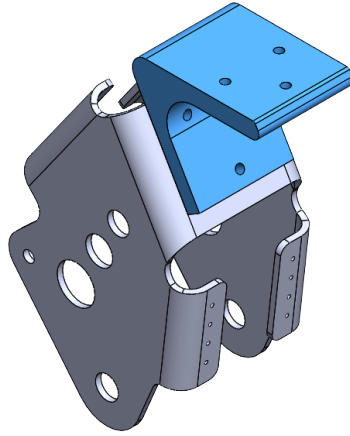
One of the fixture assemblies including the C-shaped part highlighted in blue
